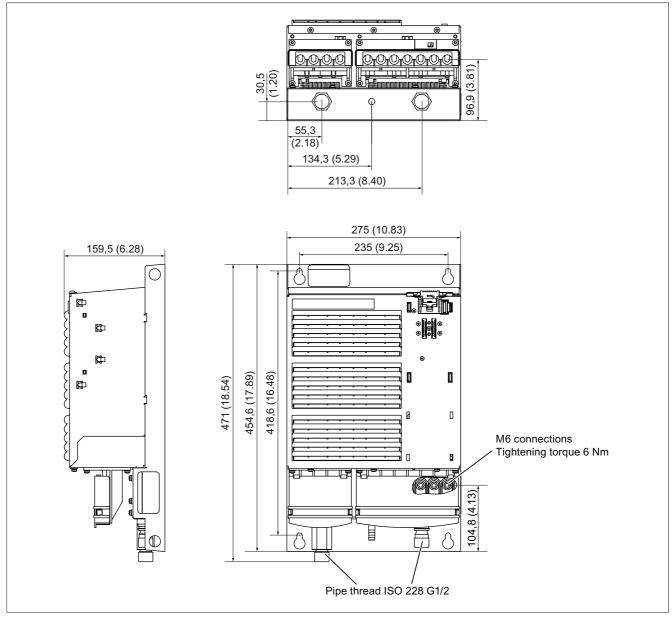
Dimension drawing of Liquid Cooled Power Module PM340, frame size FSD, all dimensions in mm and (inches)
